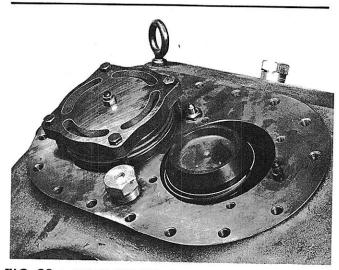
REMOVING PISTON AND CONNECTING RODS
